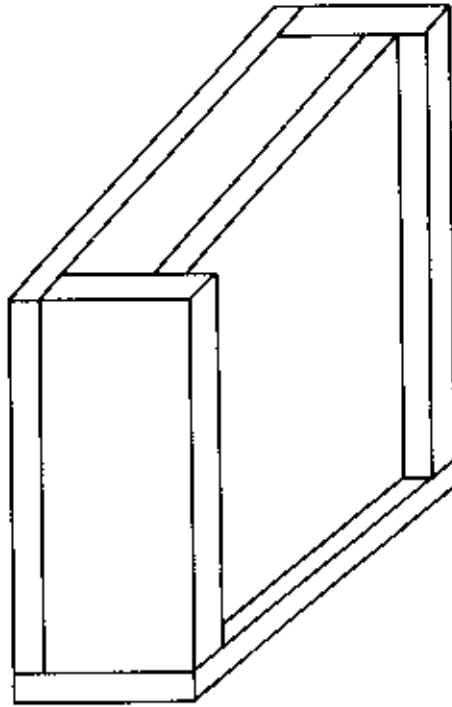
MOULD FOR PLATE SHAPED CASTING.
